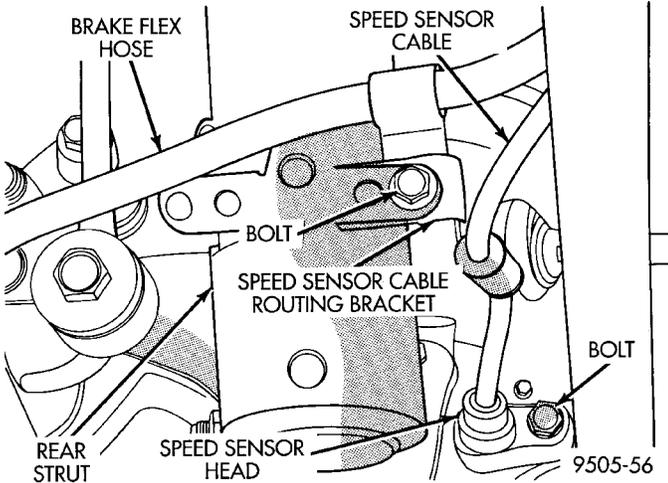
Speed Sensor Head Attachment To Disc Brake Adapter
